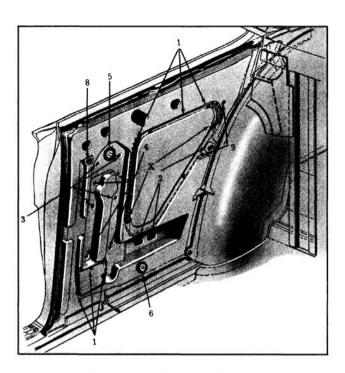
Inner Panel Sealing (47 & 57 Styles)
